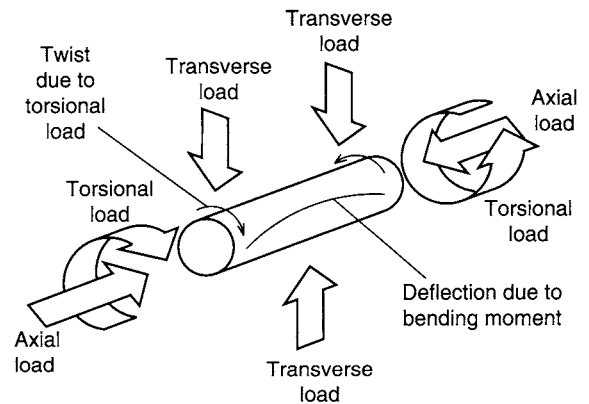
Typical shaft loading and deflection (adapted from Beswarick, 1994a).
